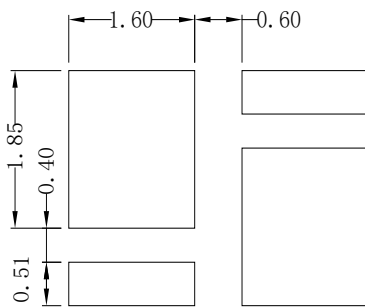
Soldering Patterns 推荐焊盘
